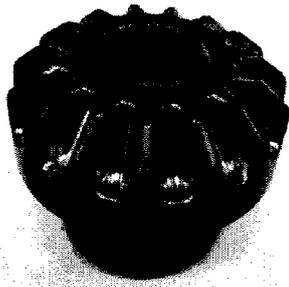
Copper bevel gear machined by WIA-V50 under the machining condition 1(Copper electrode)
